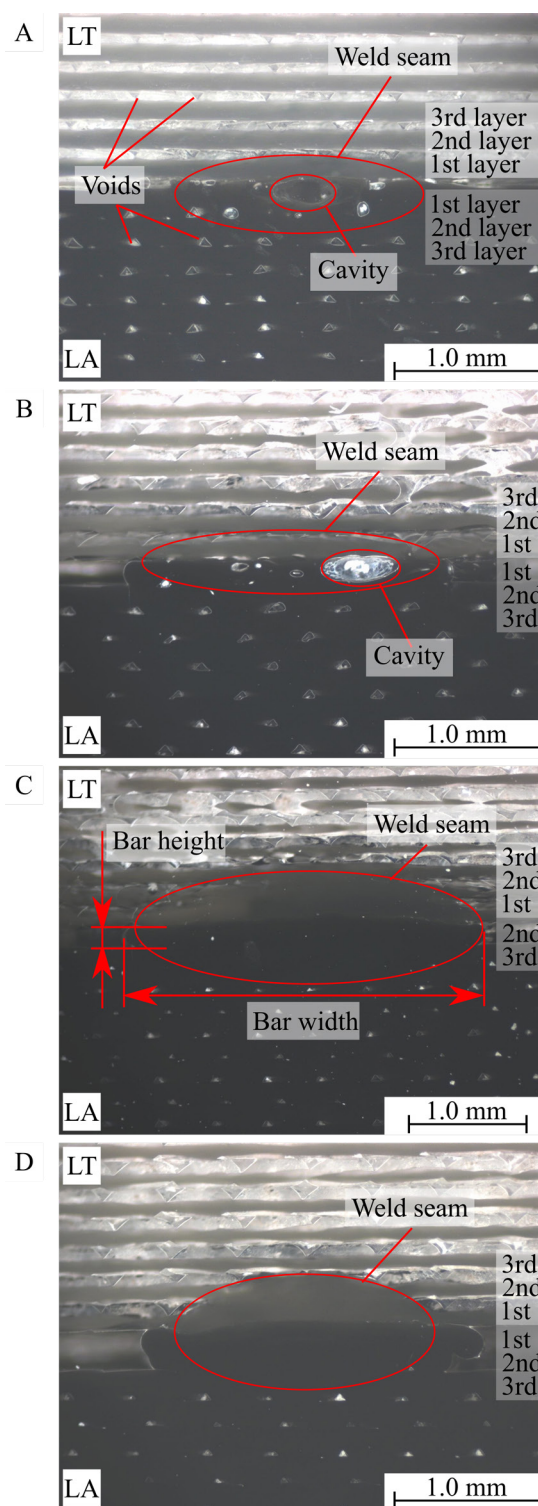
Cross sections of weld seams with no bar (A), a 200 μm high bar (B), and a 400 μm high bar (C). Welding parameter: $P = 10$ W, $v = 5$ mm/s. Cross section D shows a weld seam with a 400 μm high bar and welding parameter: $P = 10$ W, $v = 10$ mm/s.
